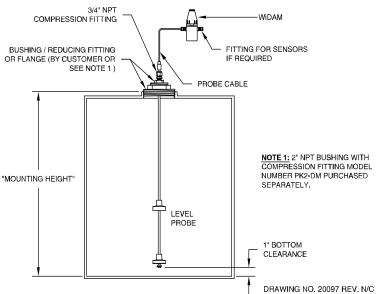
Reducer Fitting or Flange Mounting for Aboveground Tanks
